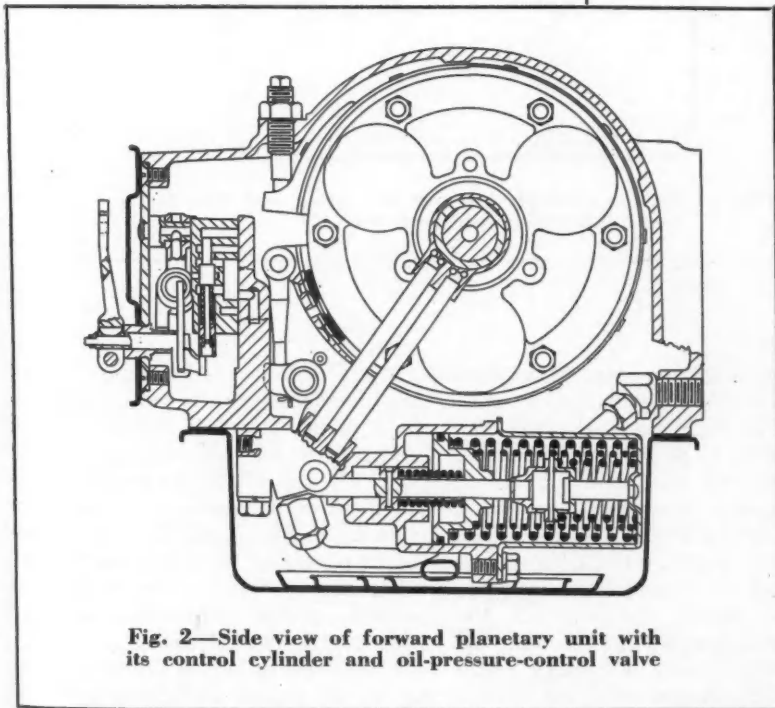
Side view of forward planetary unit with its control cylinder and oil-pressure-control valve
